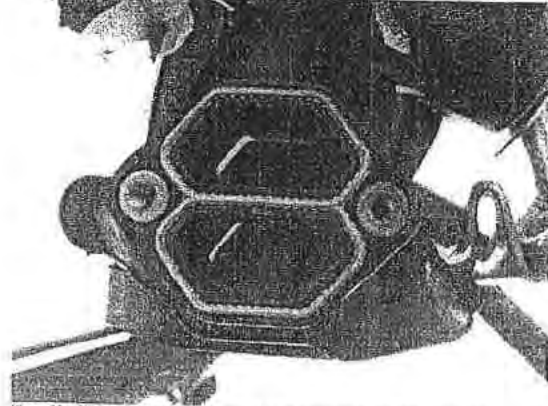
Close-up of the idle air control valve passages in the intake manifold.
